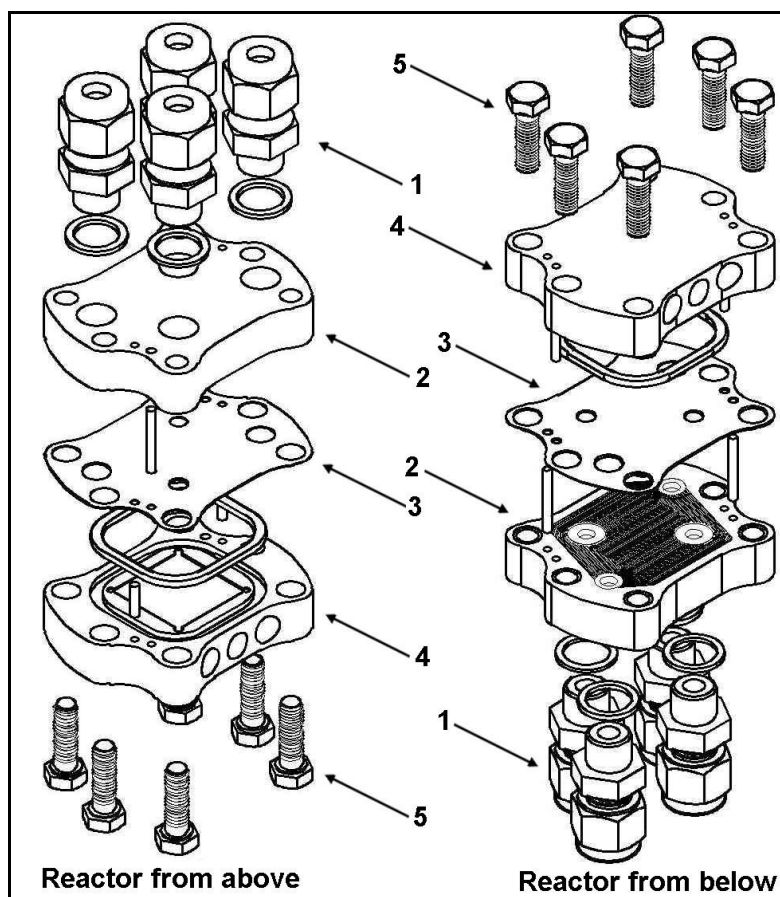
Explosion drawing of the FTC-reactor type 3 with 1: Adapters 2: top plate with microchannels for the cooling passage 3: blind foil for closing the cooling microchannels 4: base plate with reaction chamber and holes for heater cartridges 5: tightening screws.
